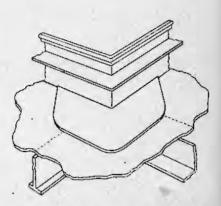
Outside view of hatch corner in upper deck of new Liberty ship. The 20 pound doubler is shown on top of deck and covering insert plate.
